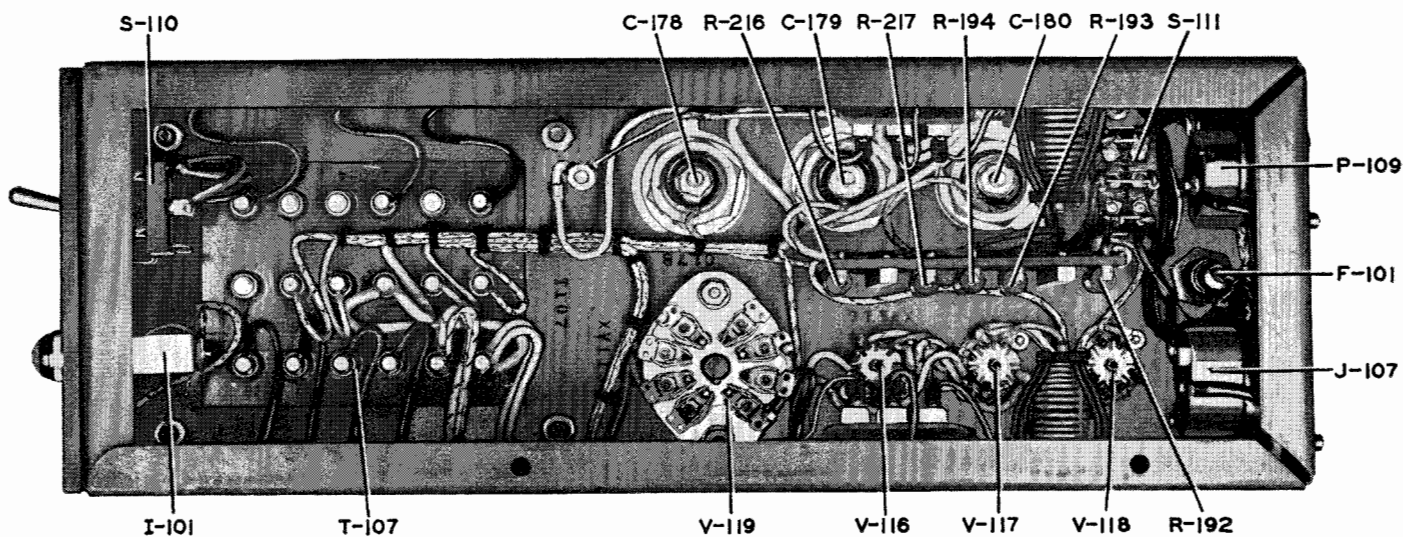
Keyer KY-30/GRT Power Supply Parts Arrangement, Left Side
